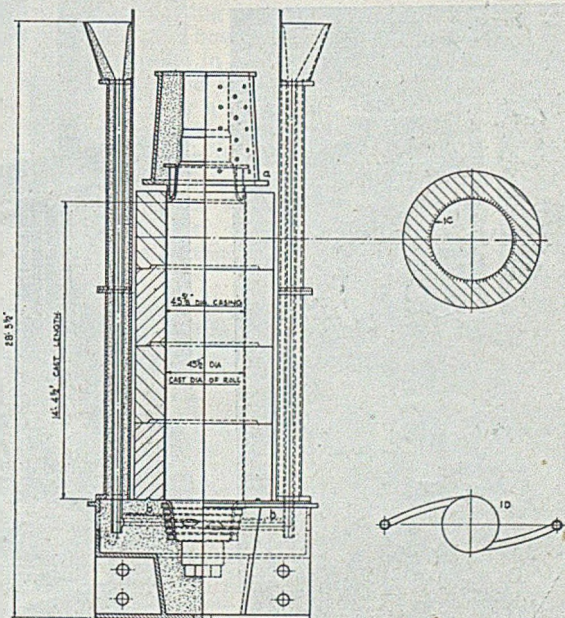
Mould Assembly for a 44½-in. diam. by 168-in. Barrel-length Chilled Plate Roll.
